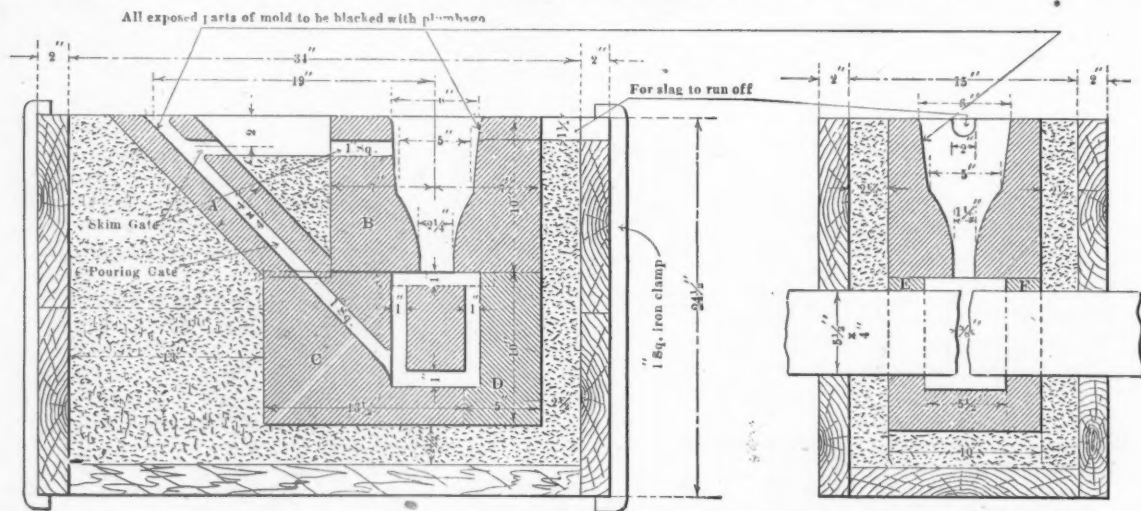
MOLD USED FOR WELDING LOCOMOTIVE FRAMES WITH THERMIT.
